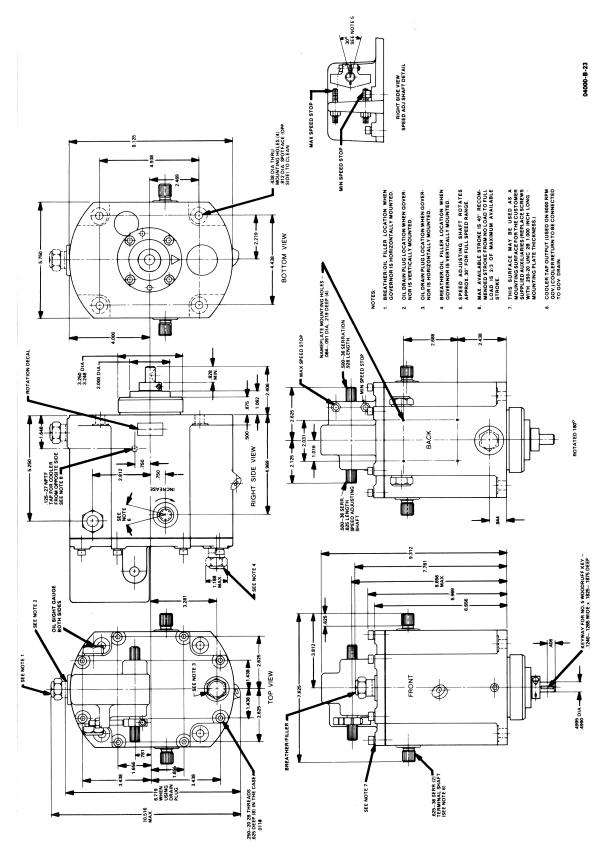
TG-13/TG-17 Outline Drawing Lever Speed Setting. Cast-Iron Case. Do Not Use For Construction
